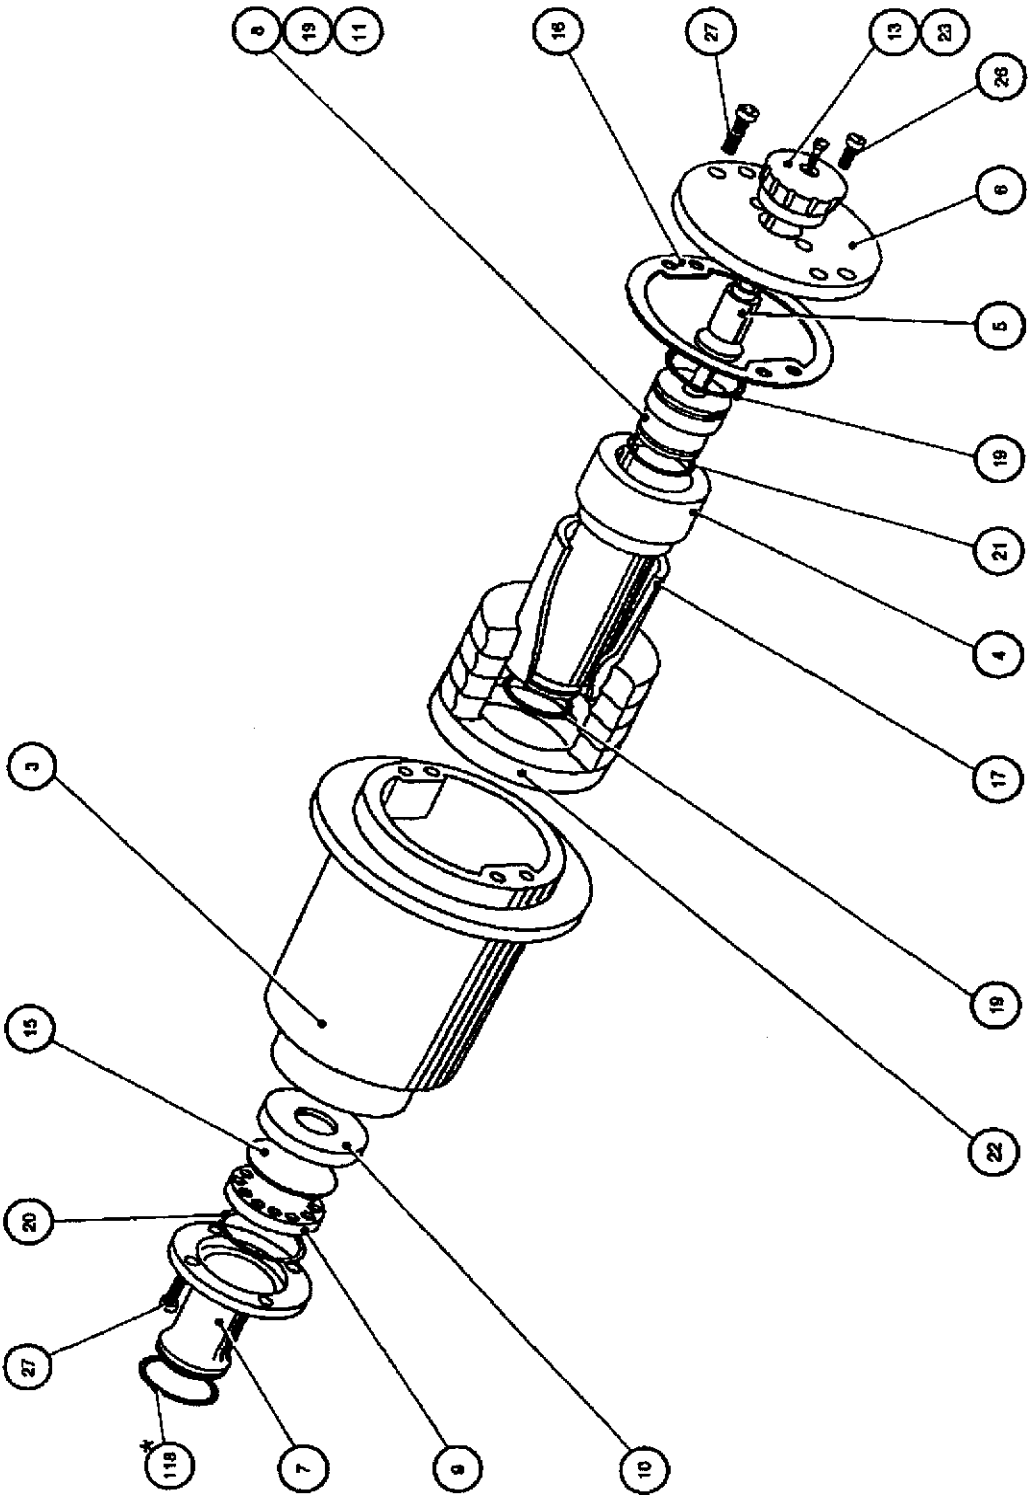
(C) Oil box end-plate and oil filter sub-assembly
